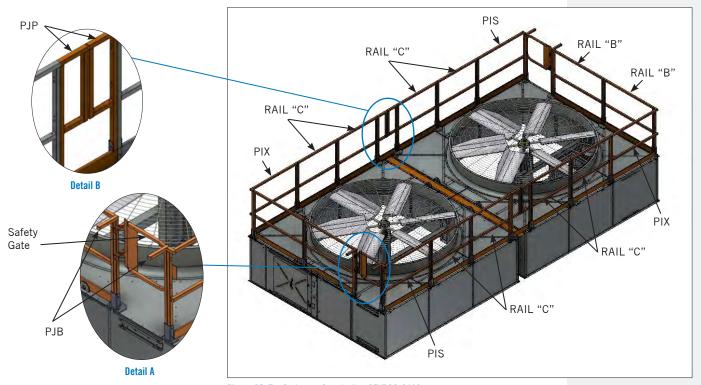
Top Perimeter Guardrails - PFi/PCC-2412
